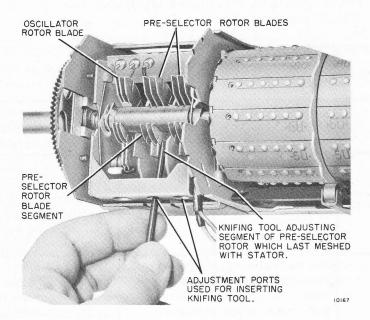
View of VHF-UHF Tuner Showing Method of Aligning (Knifing) Rotor Blades in UHF Section.
